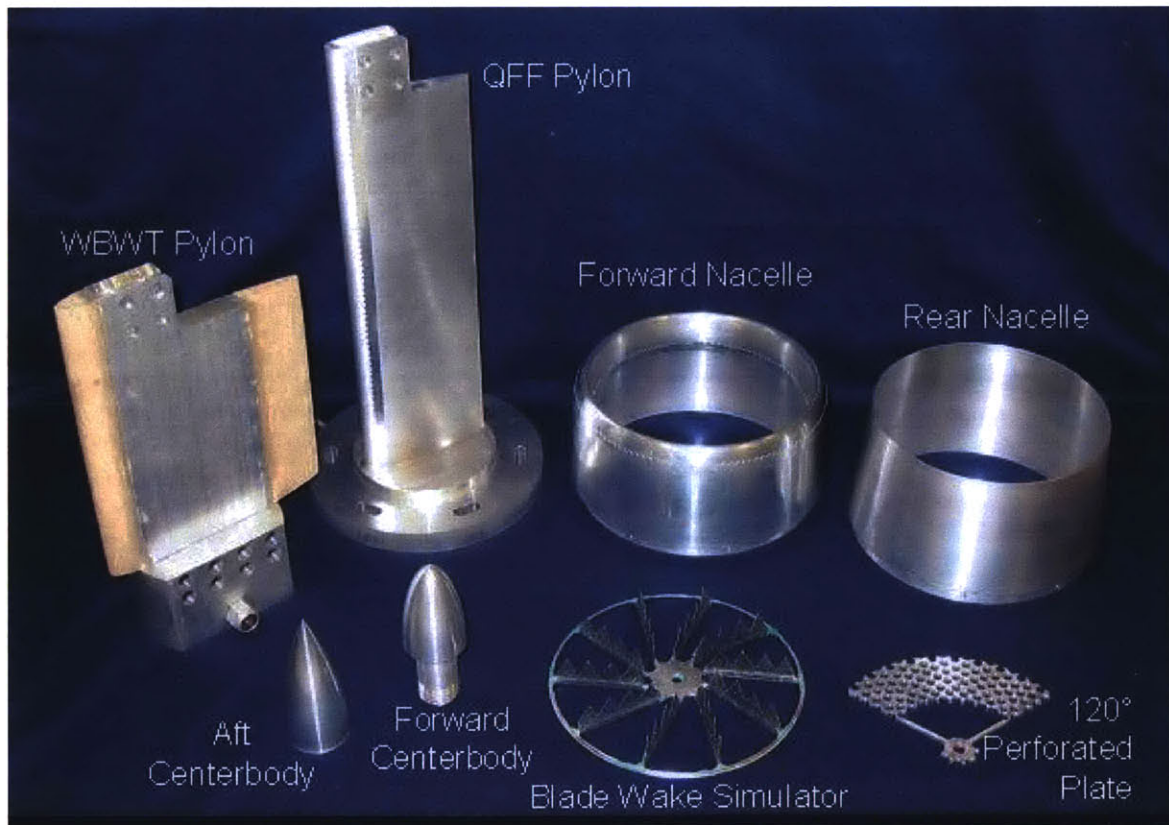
Nacelle, centerbody, support pylons, and accessory swirl tube equipment. Parts shown are fabricated from aluminum alloy T6061 via CNC lathe, CNC mill, or conventional metal machining methods.
